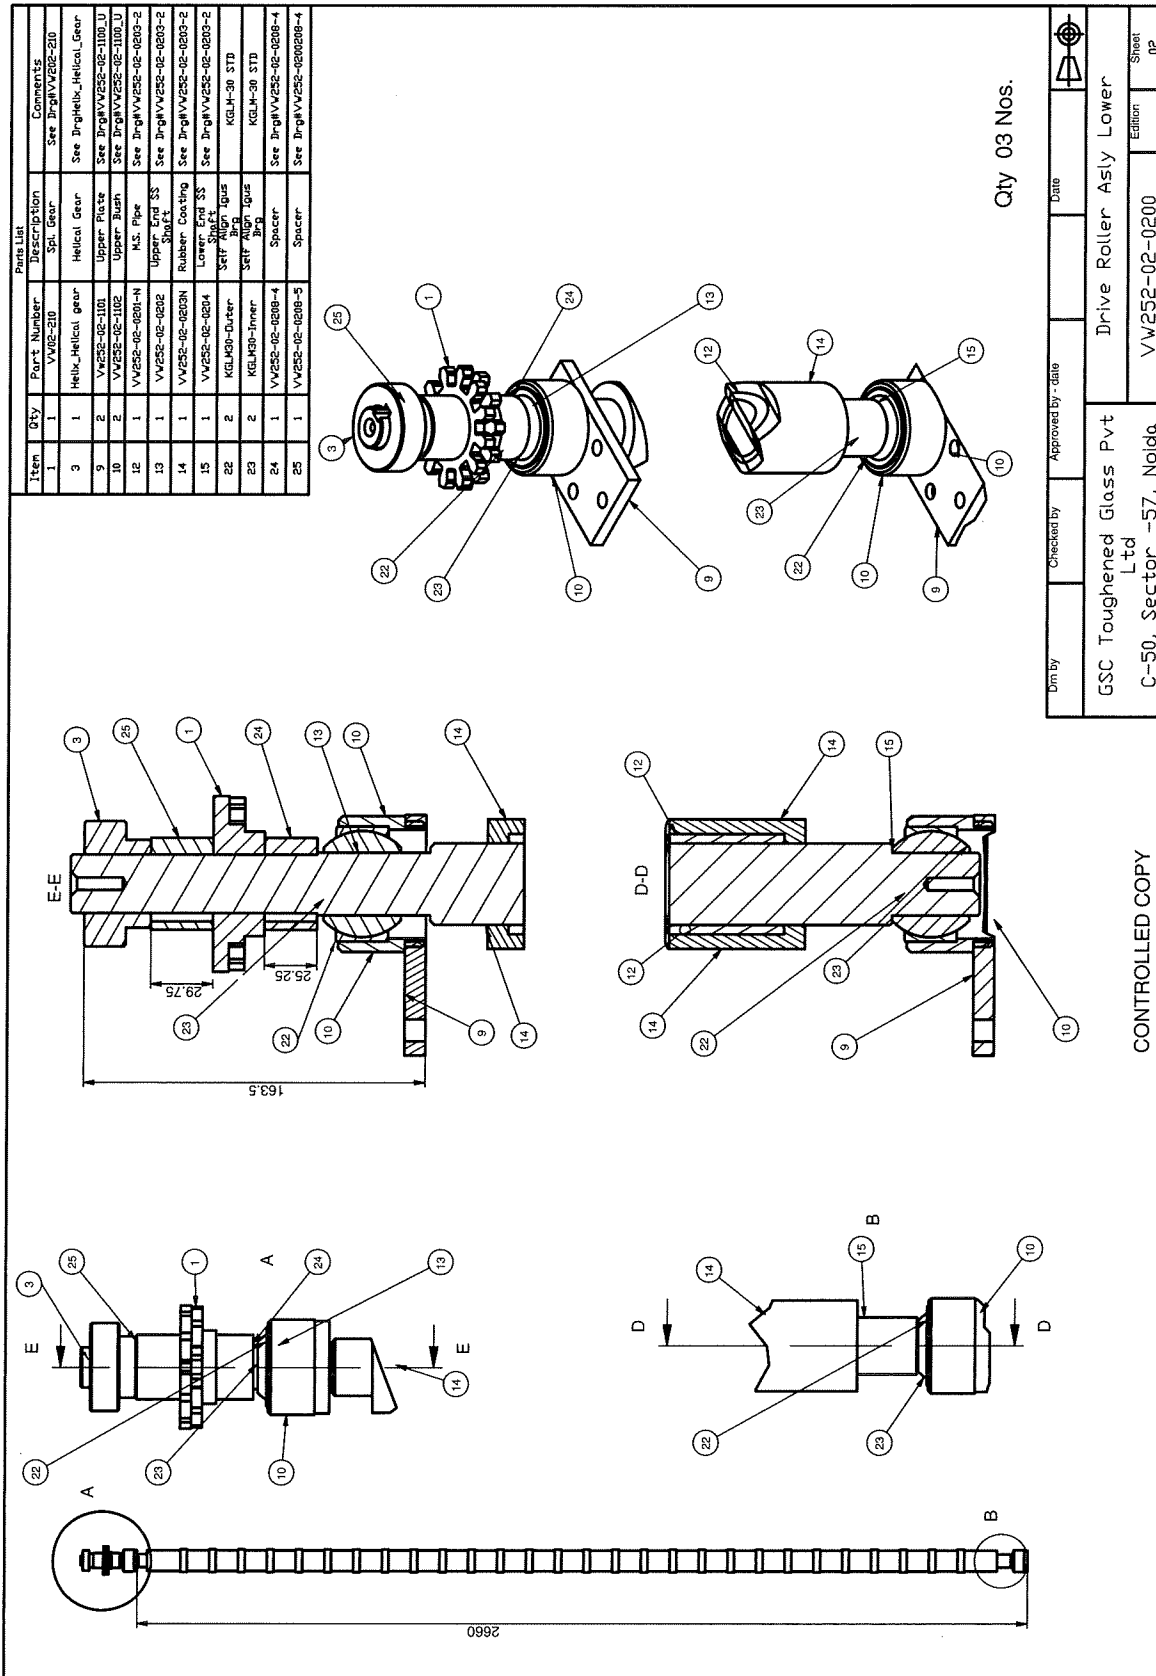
Drawings are used to describe objects. Shown is a CAD-based assembly drawing with information about parts and dimensions used in manufacturing. Orthographic, section, and pictorial views are used to describe the assembly. (Autodesk, Inc.)
